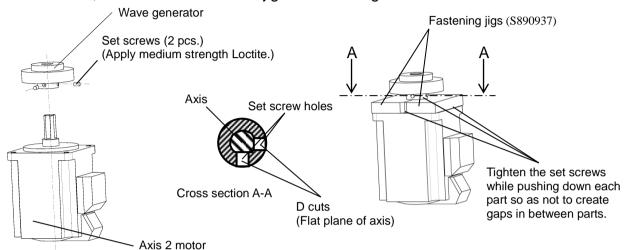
Dismounting axis 2 motor assembly (KHL-300, KHL-400)
